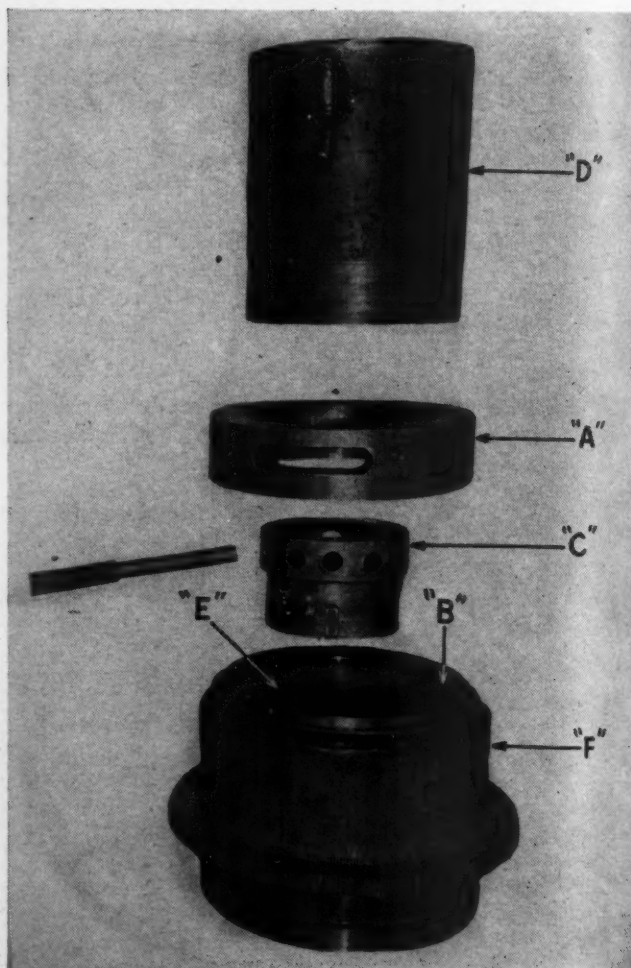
Tools for tightening disc-spring design railway motor commutator—*D* is a cylinder which transmits the force of the hydraulic press to the pressure ring *A* and disc spring *B*—The pressure ring is machined in such a manner that the full force of the press is applied to the inner diameter of the upper face of the disc spring, thereby causing angular deflection—As pressure is applied the bar for wrench *C* is inserted through the slot of pressure ring and then turned—The keys on wrench *C* engage the keyways inside the commutator nut *E*—The copper commutator bars are identified by *F
